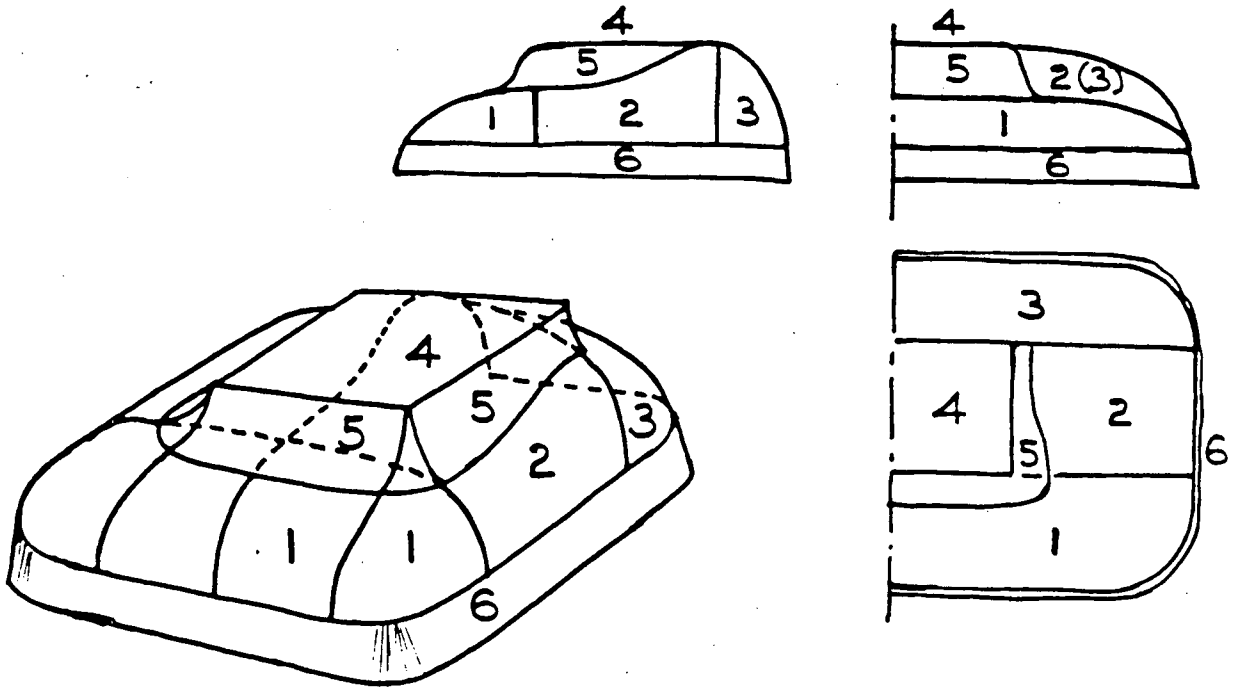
Initial proposed sketch of vacuum cleaner housing mould
